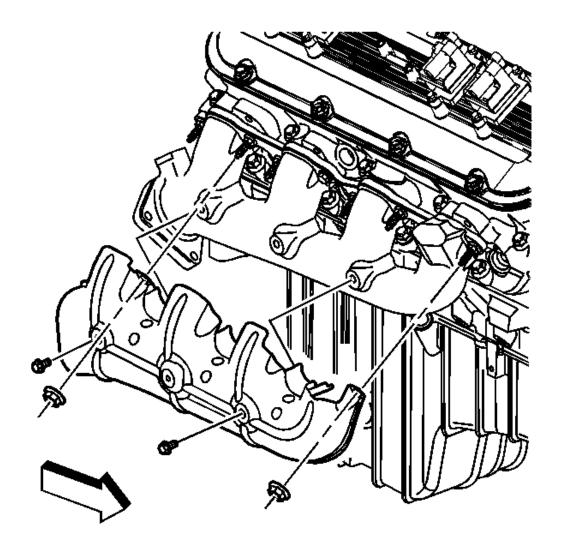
View Of Exhaust Manifold Heat Shield, Bolts & Nuts (Right) Courtesy of GENERAL MOTORS CORP.
